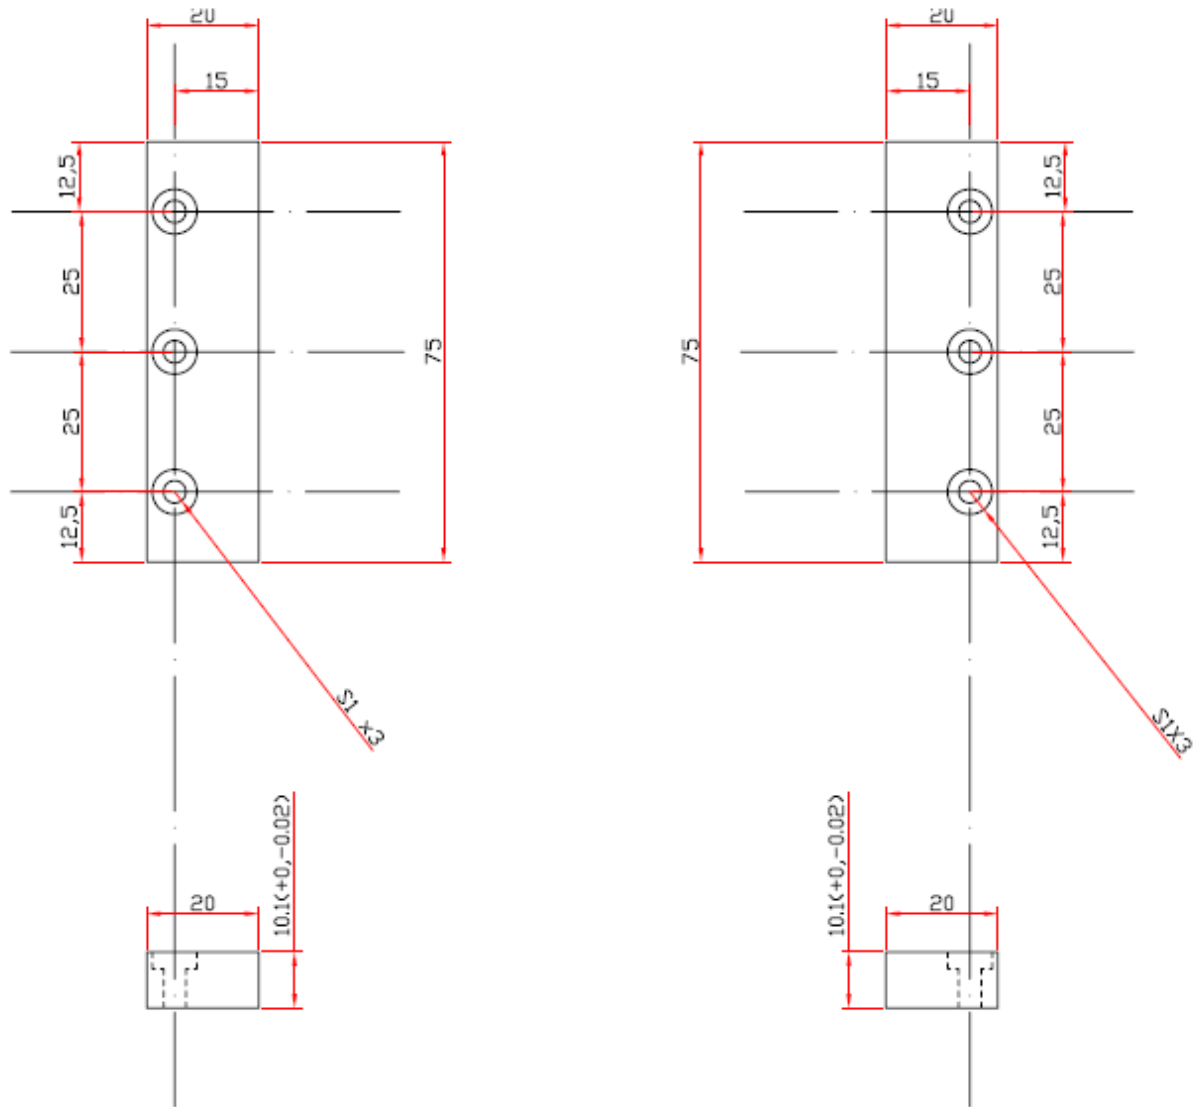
Fasten Boards (Left and Right x1), Installed on the top of side walls respectively, AISI 4130
